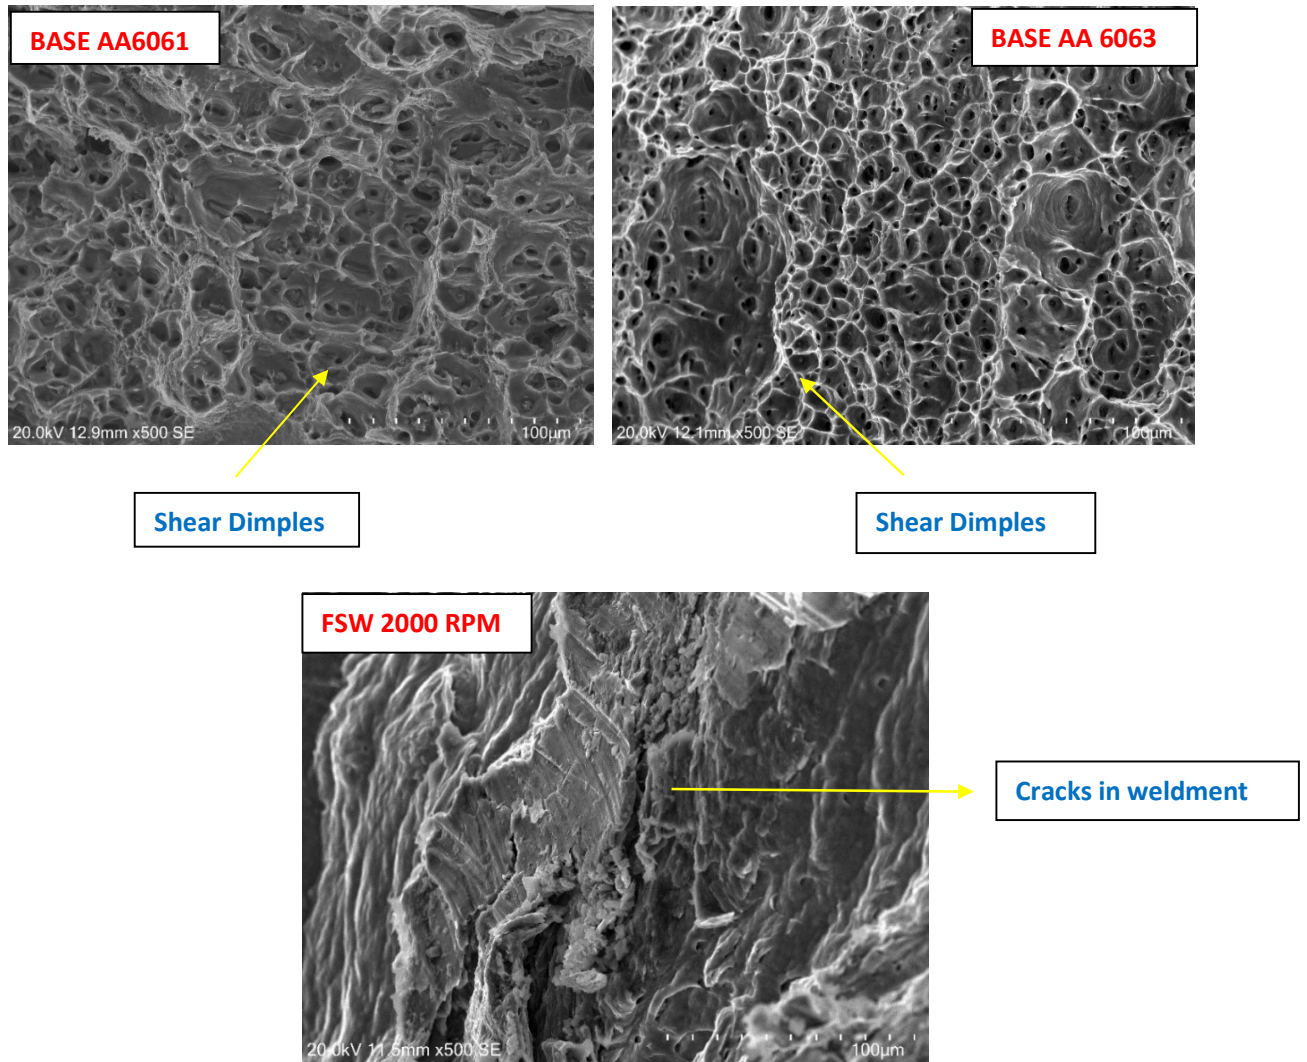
Tensile Fractography Base AA 6061, AA 6063 and Friction Stir welded sample with various Tool Rotation at 500 X magnification.
